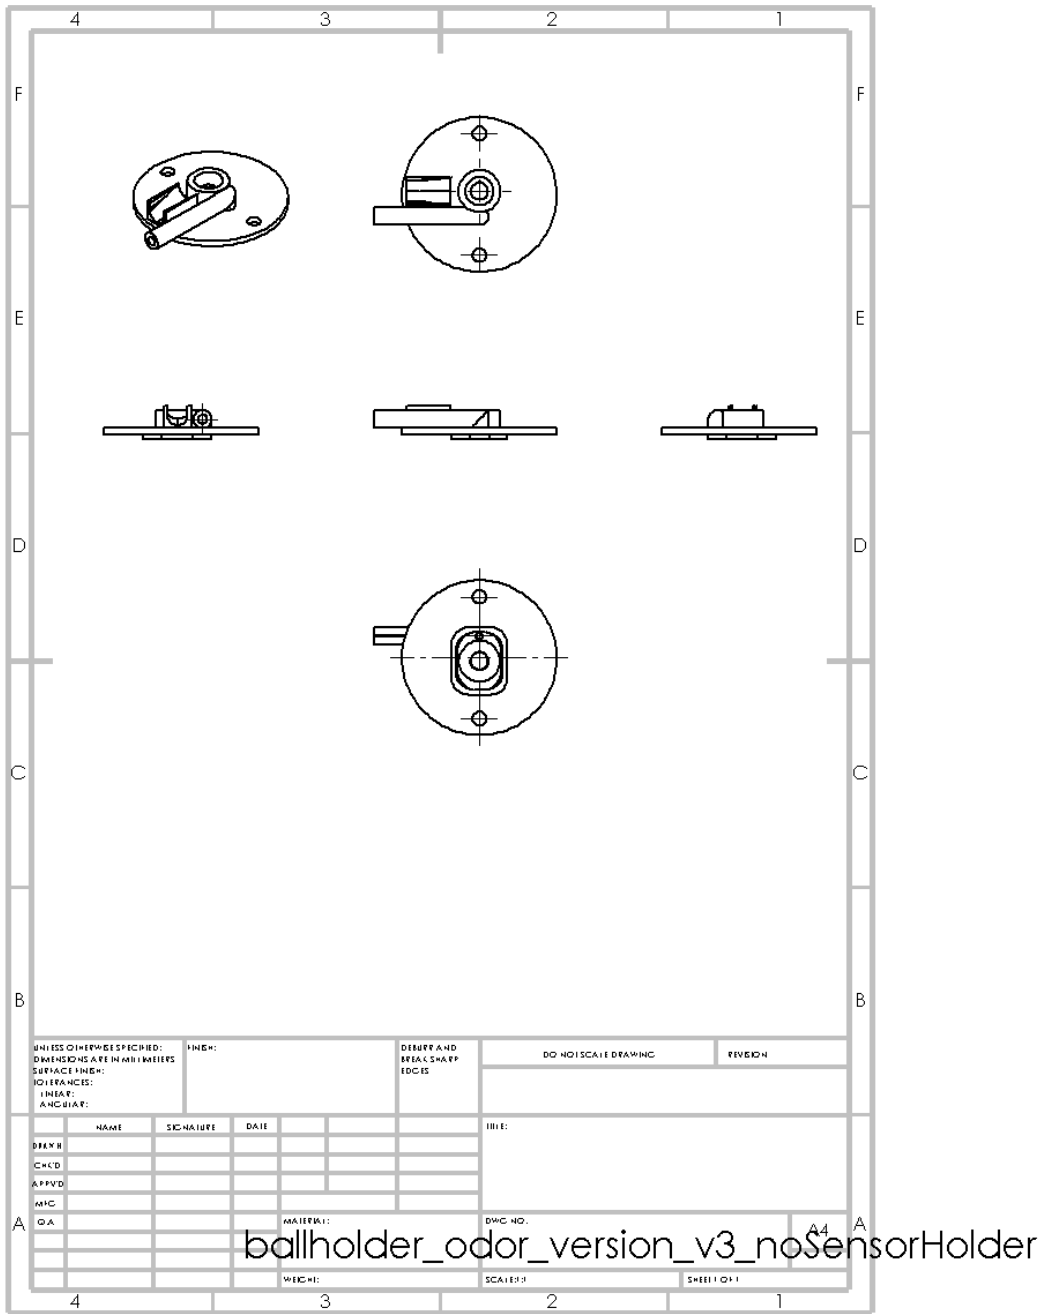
3D drawing of fly-gym ball holder with odor port housing.
